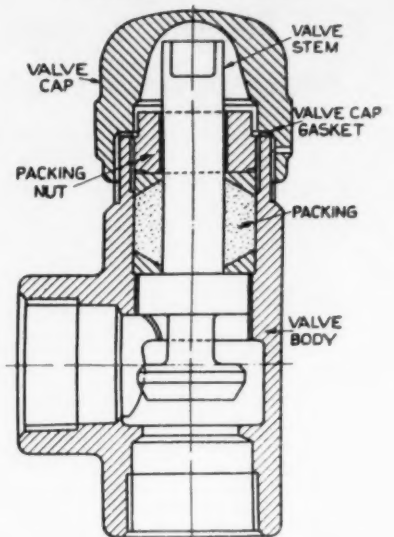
demonstrates a double packed valve with seal nut which is used in some Freon machines.
